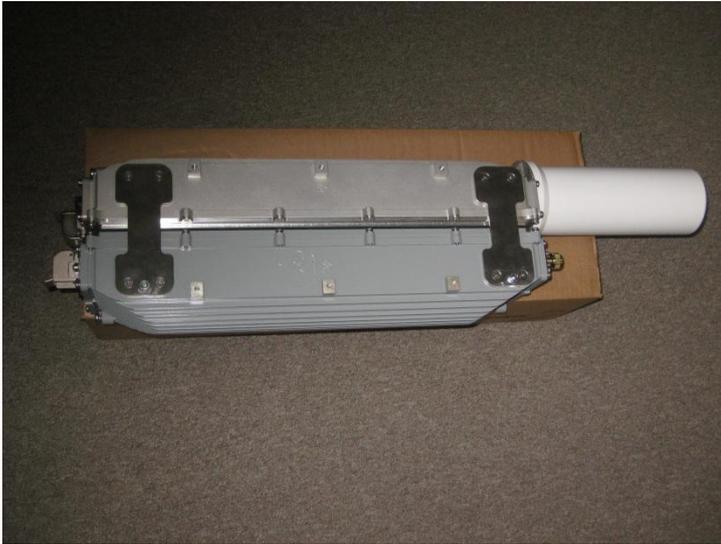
Position back to back assembly on side to tighten all joining plate screws
